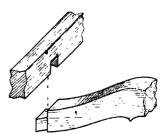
,-Joint of Plant Stand's Lower Rails.
